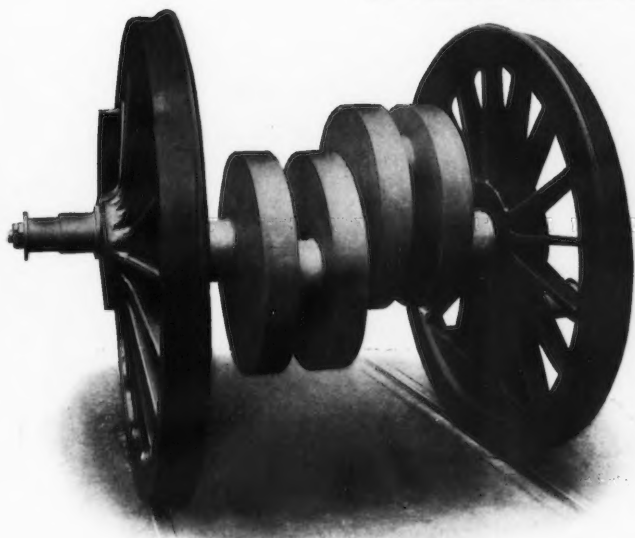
DRIVING WHEELS AND CRANK AXLE.
